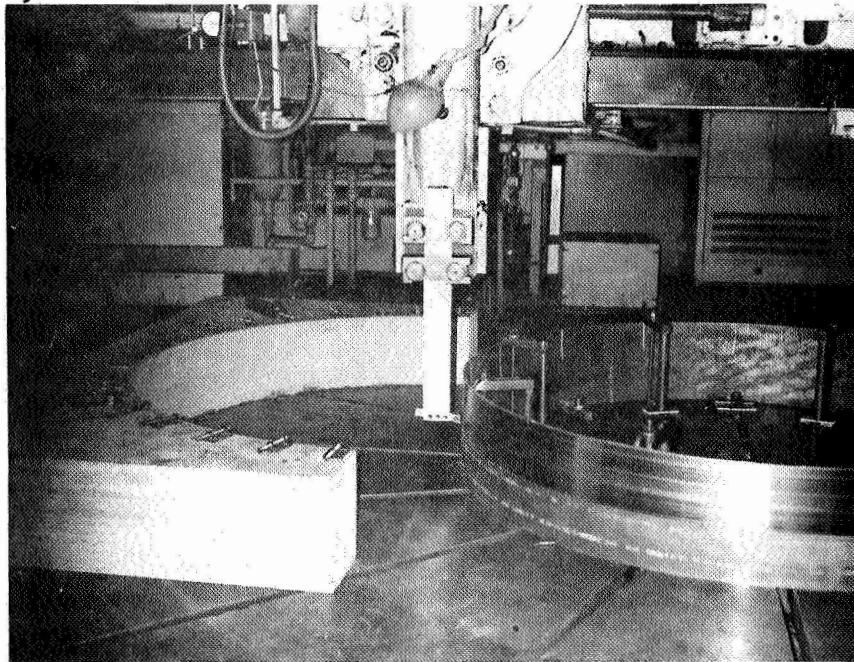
MACHINING FOR STEEL STEPPED LOAD INTRODUCTION RING
